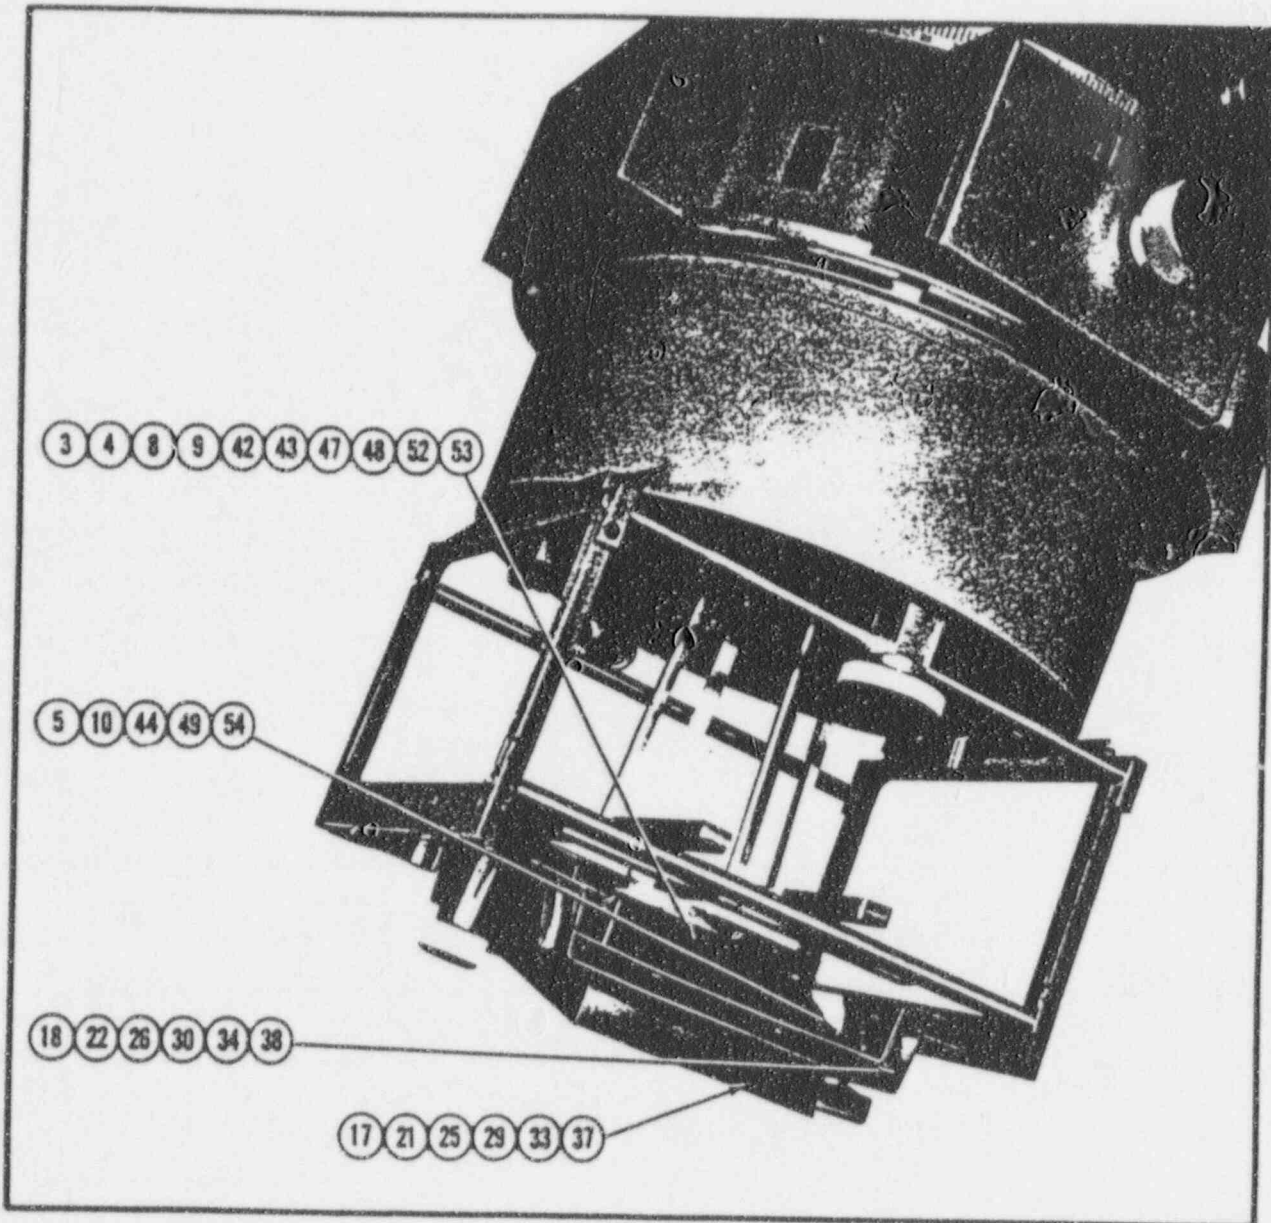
COBALT, WEDGES AND COMPENSATOR ASSEMBLIES
